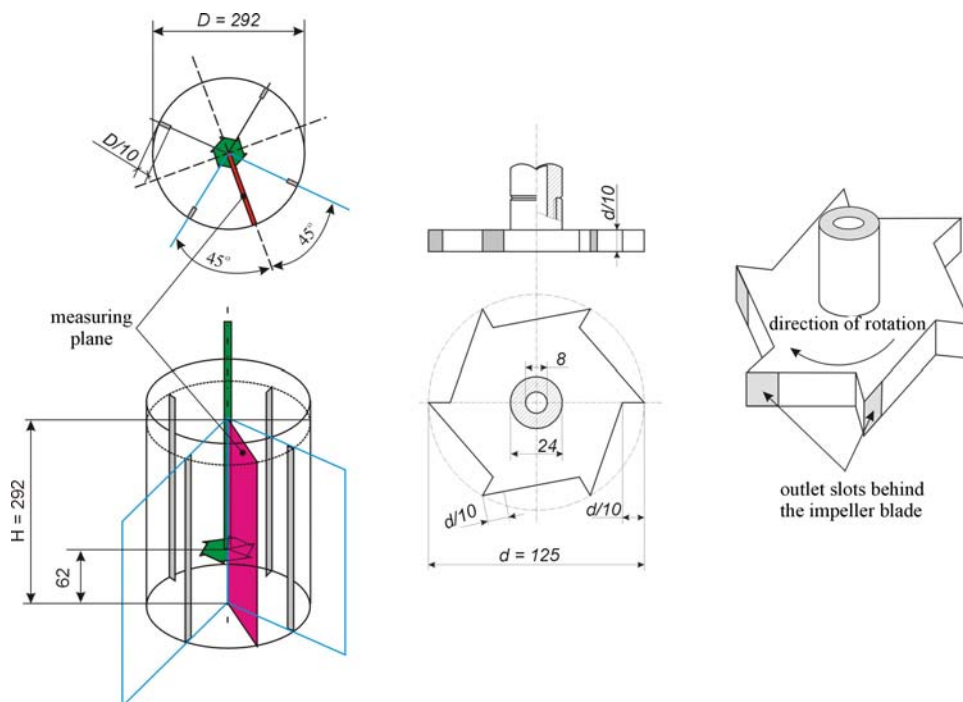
Basic dimensions of an agitator vessel and impeller.
